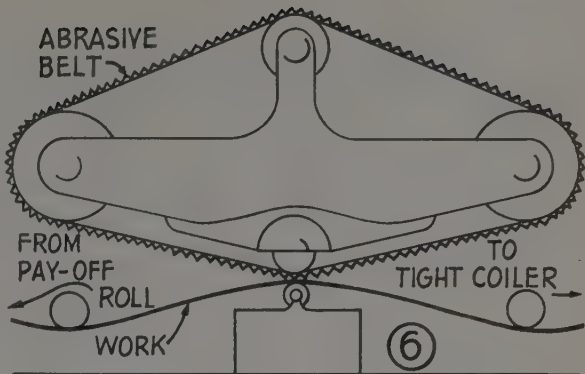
Wide belt unit used in grinding and polishing continuous strips of stainless steel
